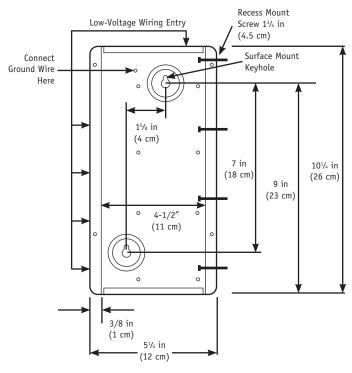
Dimensions and Mounting (HWI-ENC-CC)
